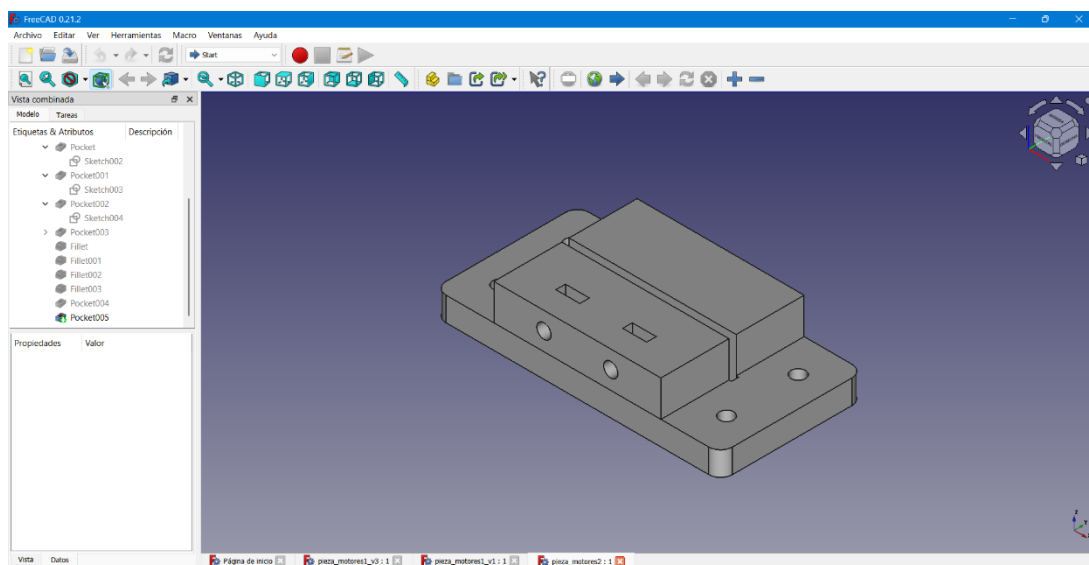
Screenshot of FreeCAD with the completed design of one of the pieces
